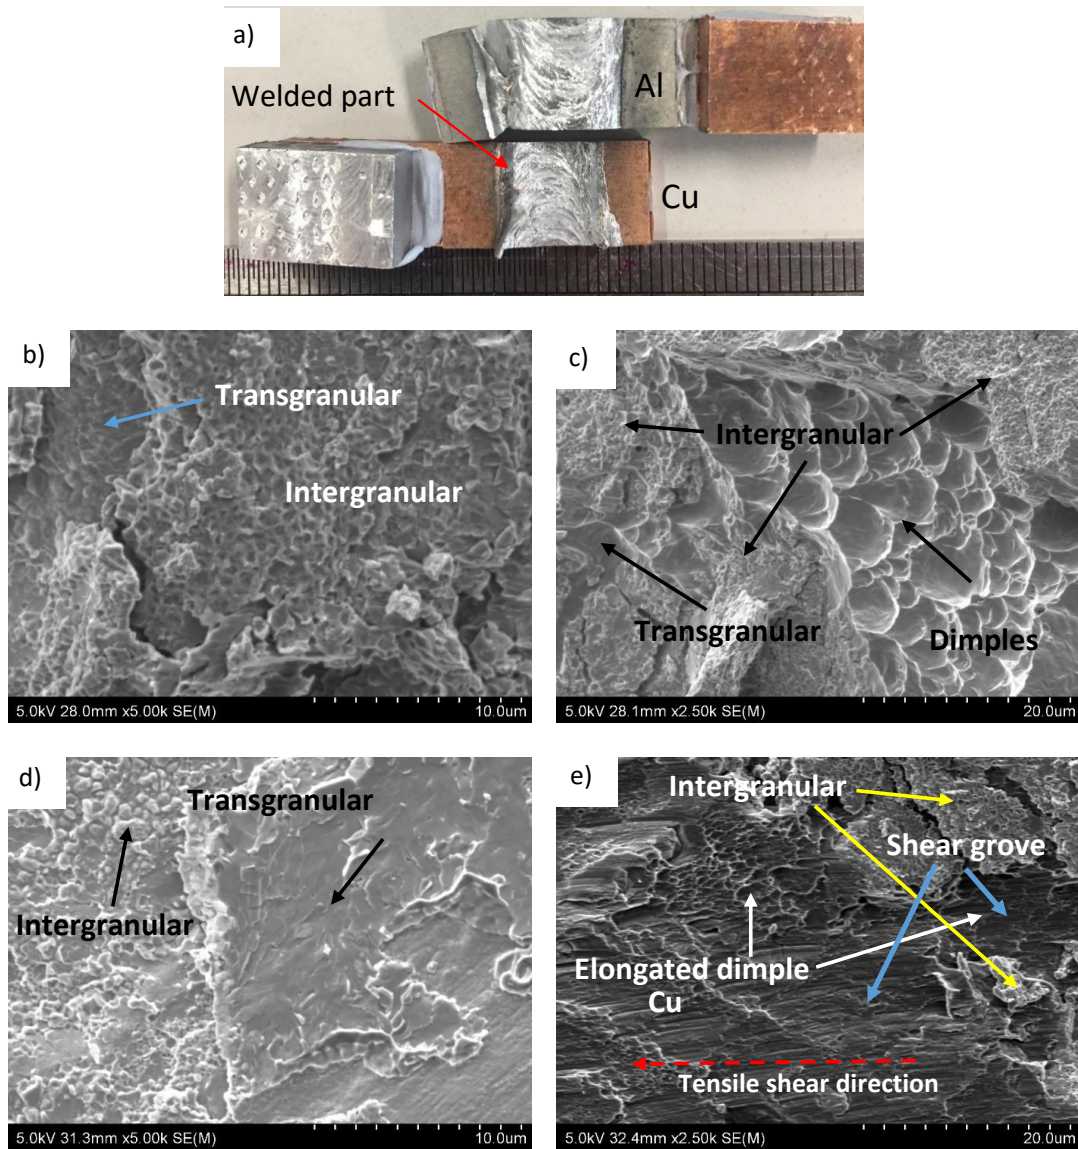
10(a) Fracture surface of broken tensile shear test sample of a weld with a d_p of 0.2 mm; (b)-(c) aluminium side fracture surface; (d)-(e) fracture surface of copper side.
